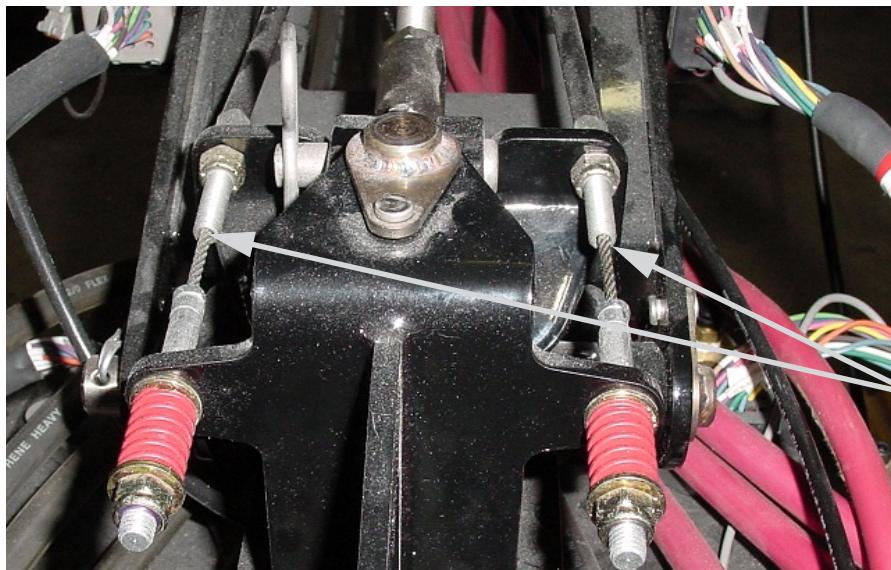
Center Guide Rod Lower Pivot Pin Lubrication
